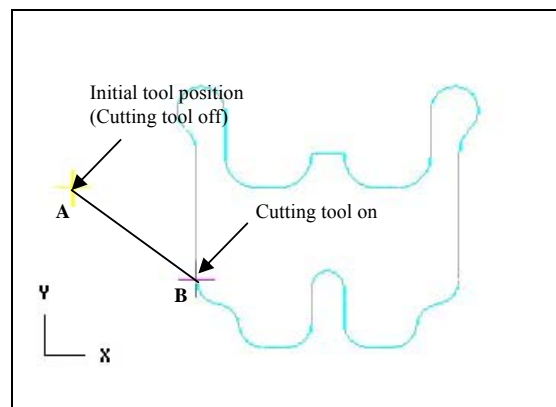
The CNC machine tool must produce a formed surface on a workpiece.
